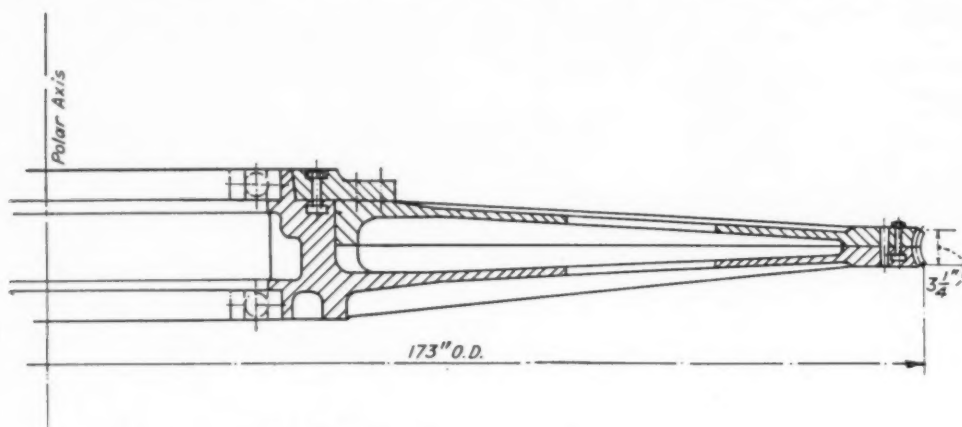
HALF SECTION THROUGH THE DRIVING GEAR
